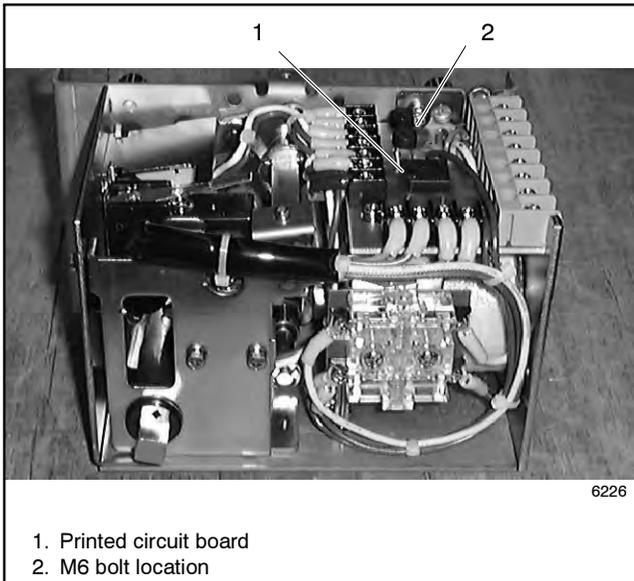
Printed Circuit Board and M6 Bolt (for closing coil)
